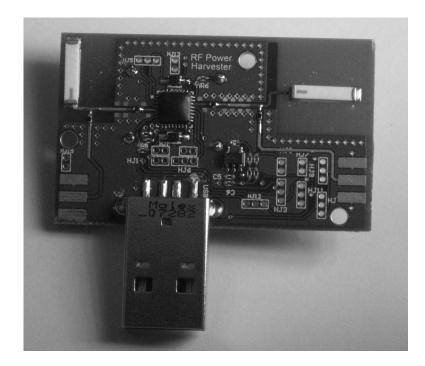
Photograph of the front-view test printed circuit board (PCB).
